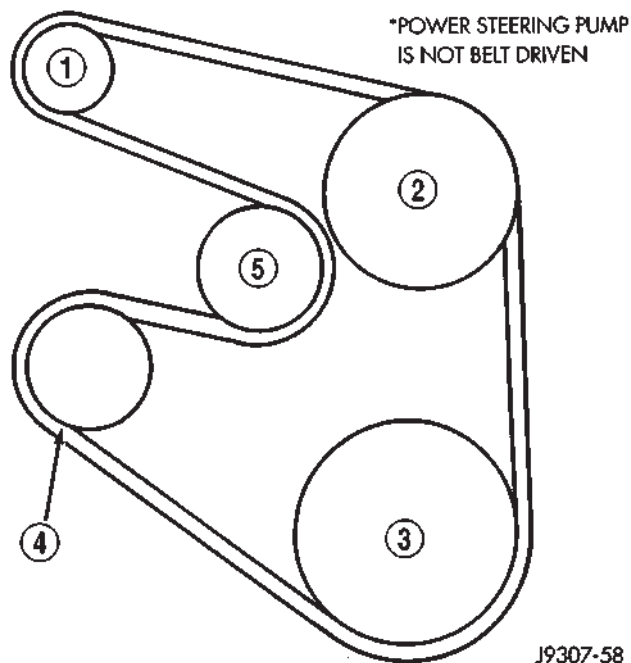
Belt Routing—5.9L Diesel Engine—Without A/C
